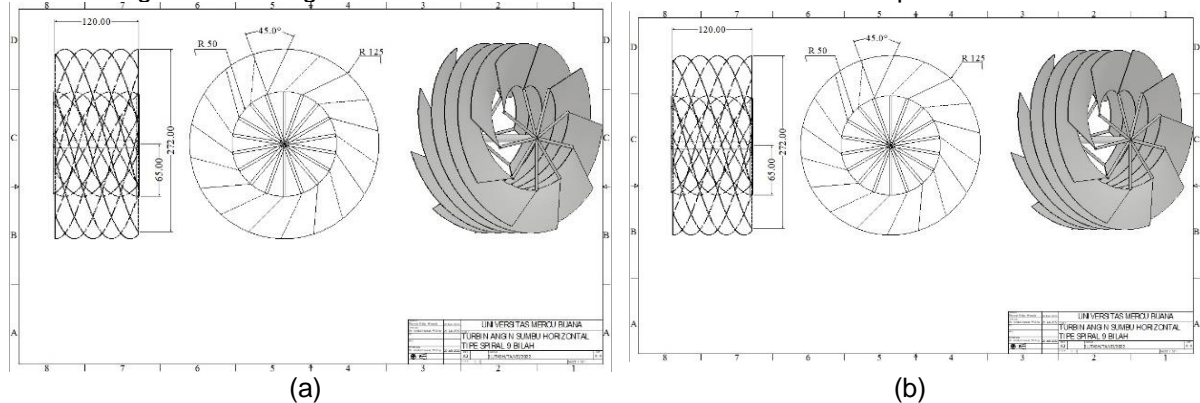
(a) TASH blade 50mm (b) TASH blade 65mm
